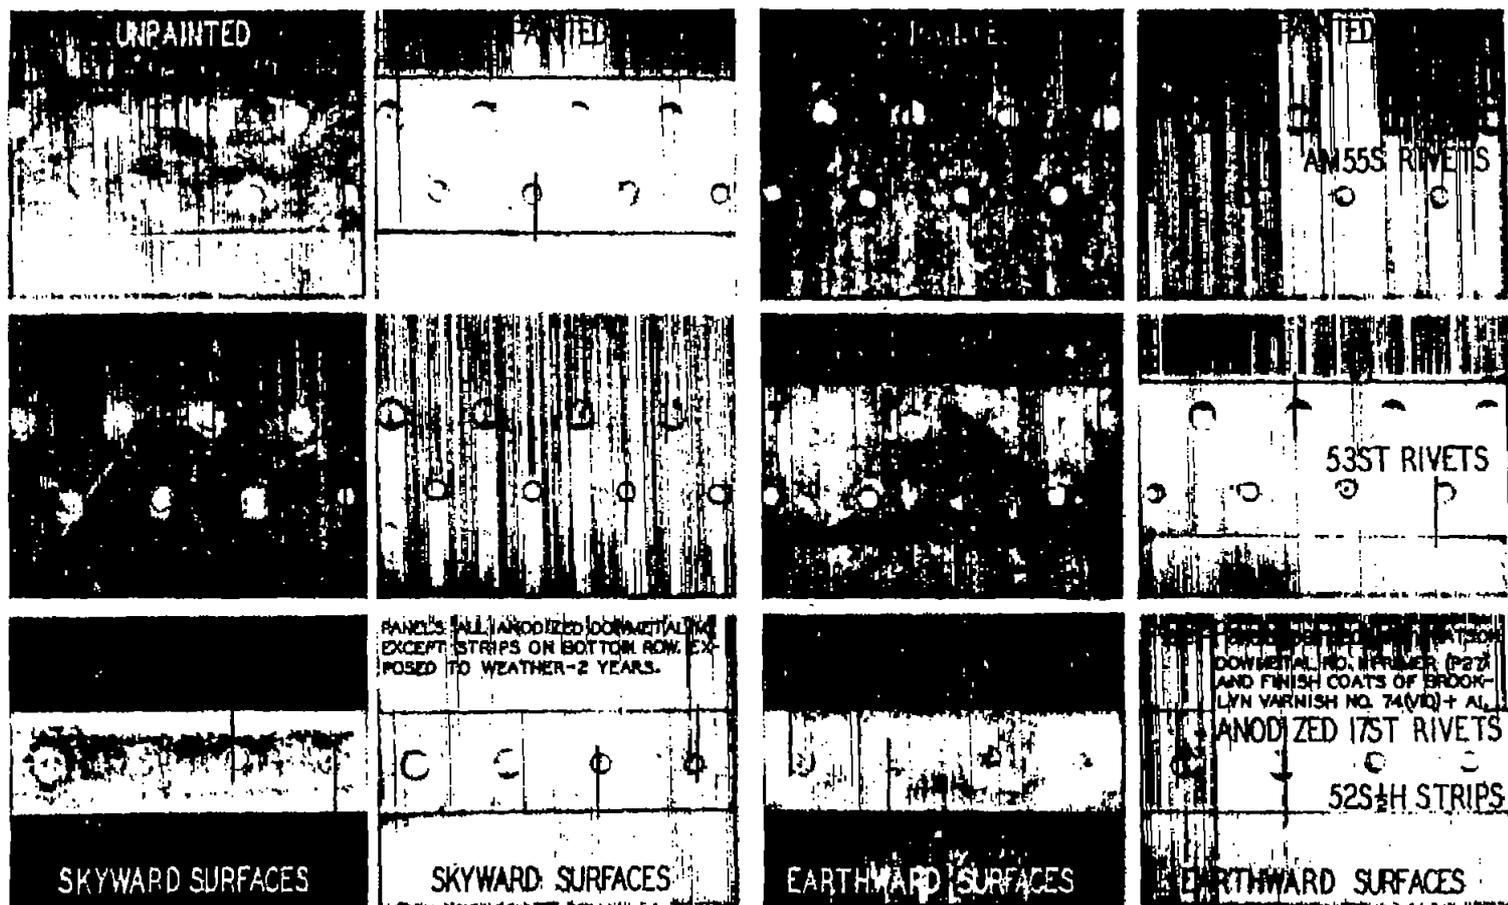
Rivets on Dowmetal M panels exposed to the weather. The AM 55S rivets were very much less attacked than the 53ST or anodized 17ST rivets. The paint coating, however, protected both the rivets and the sheet from attack. x 1/2 (8).
